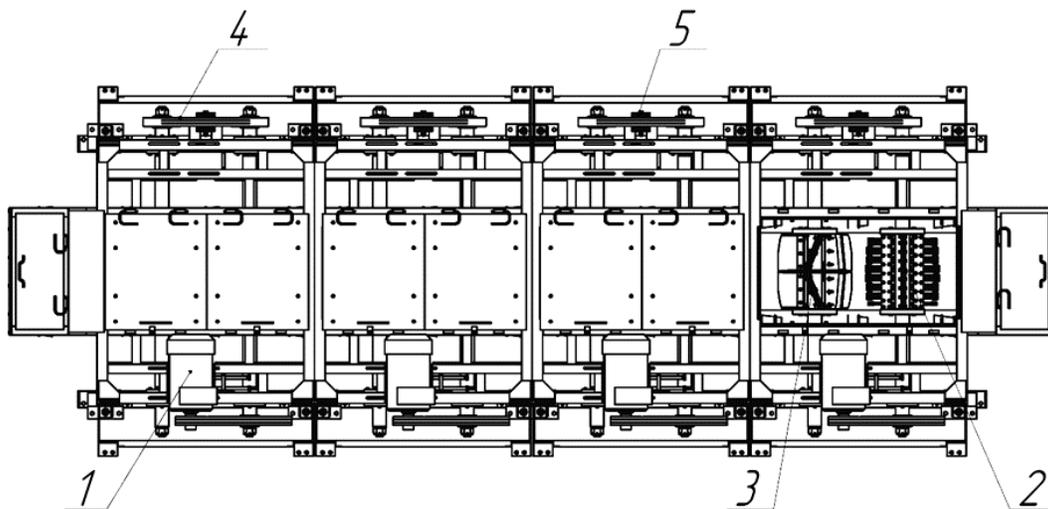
Four section rotary mixer (top view): (1) electric motor; (2) cable rotor; (3) blade rotor; (4) belt transmission; (5) tension roller
